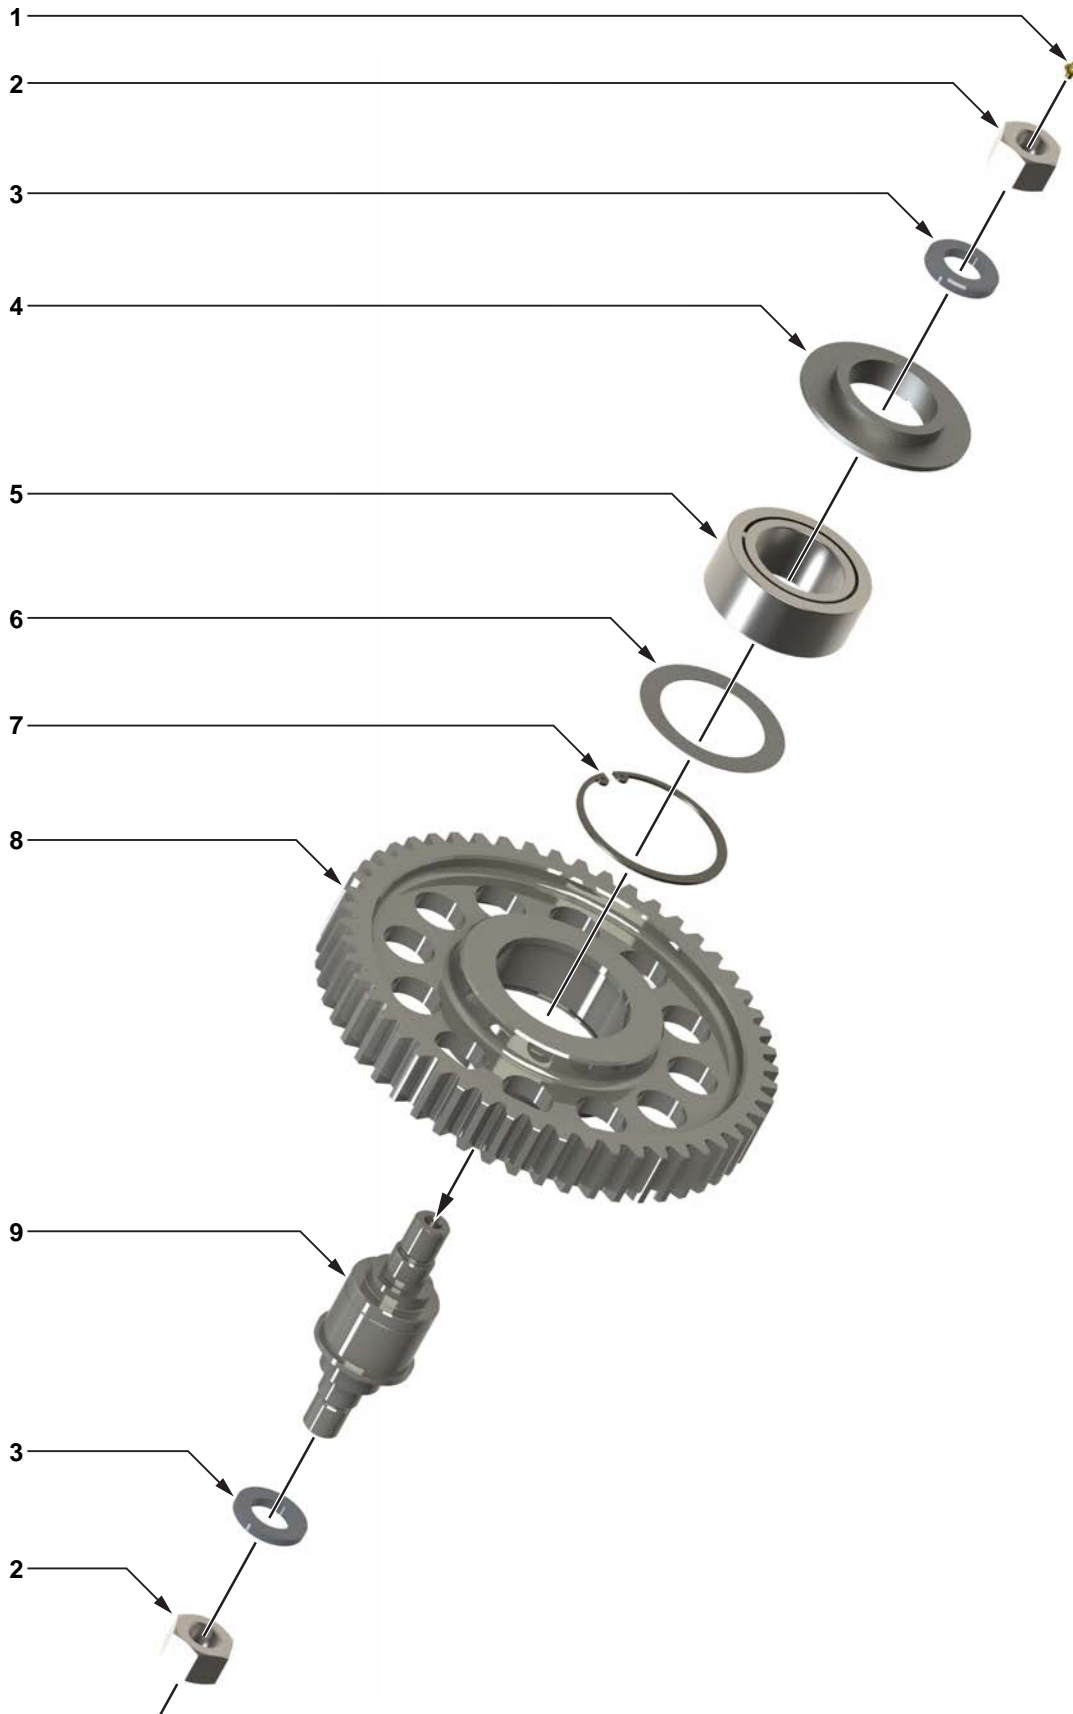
101-3497 HD31-80K Pinion Idler Exploded
